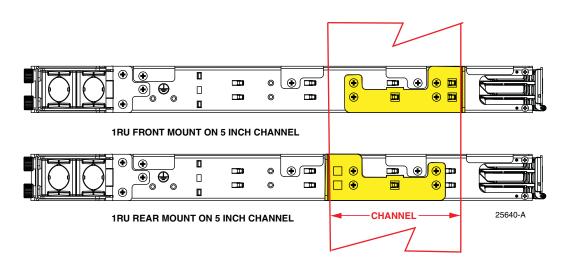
1RU Mounting Bracket Positions (Front and Rear on 5-Inch Channel)
